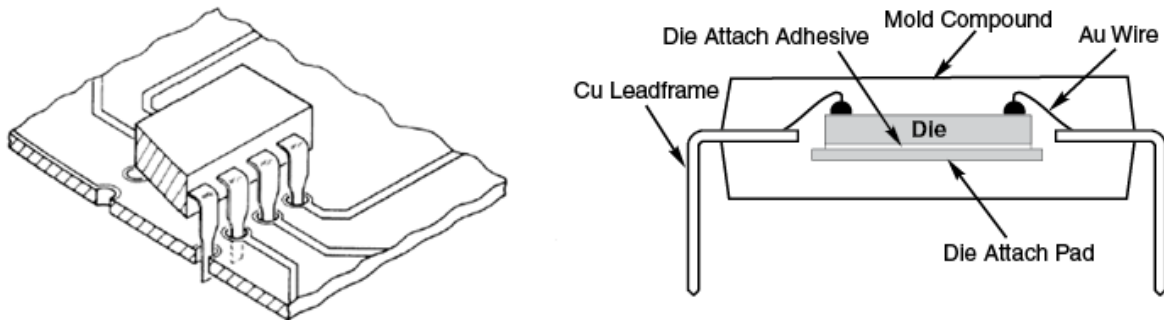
Through Hole chip carrier mounted on board (left) [4], Cross-section view of Through Hole chip carrier (right) [6]
